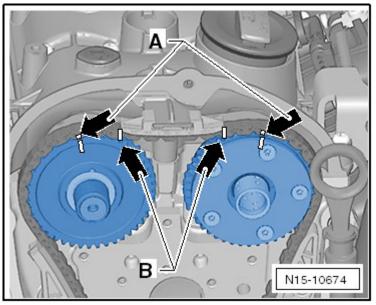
Identifying Position Marks: Drive Chain To Sprockets -A- And Drive Chain To Guide Rail -B-Courtesy of VOLKSWAGEN UNITED STATES, INC.
